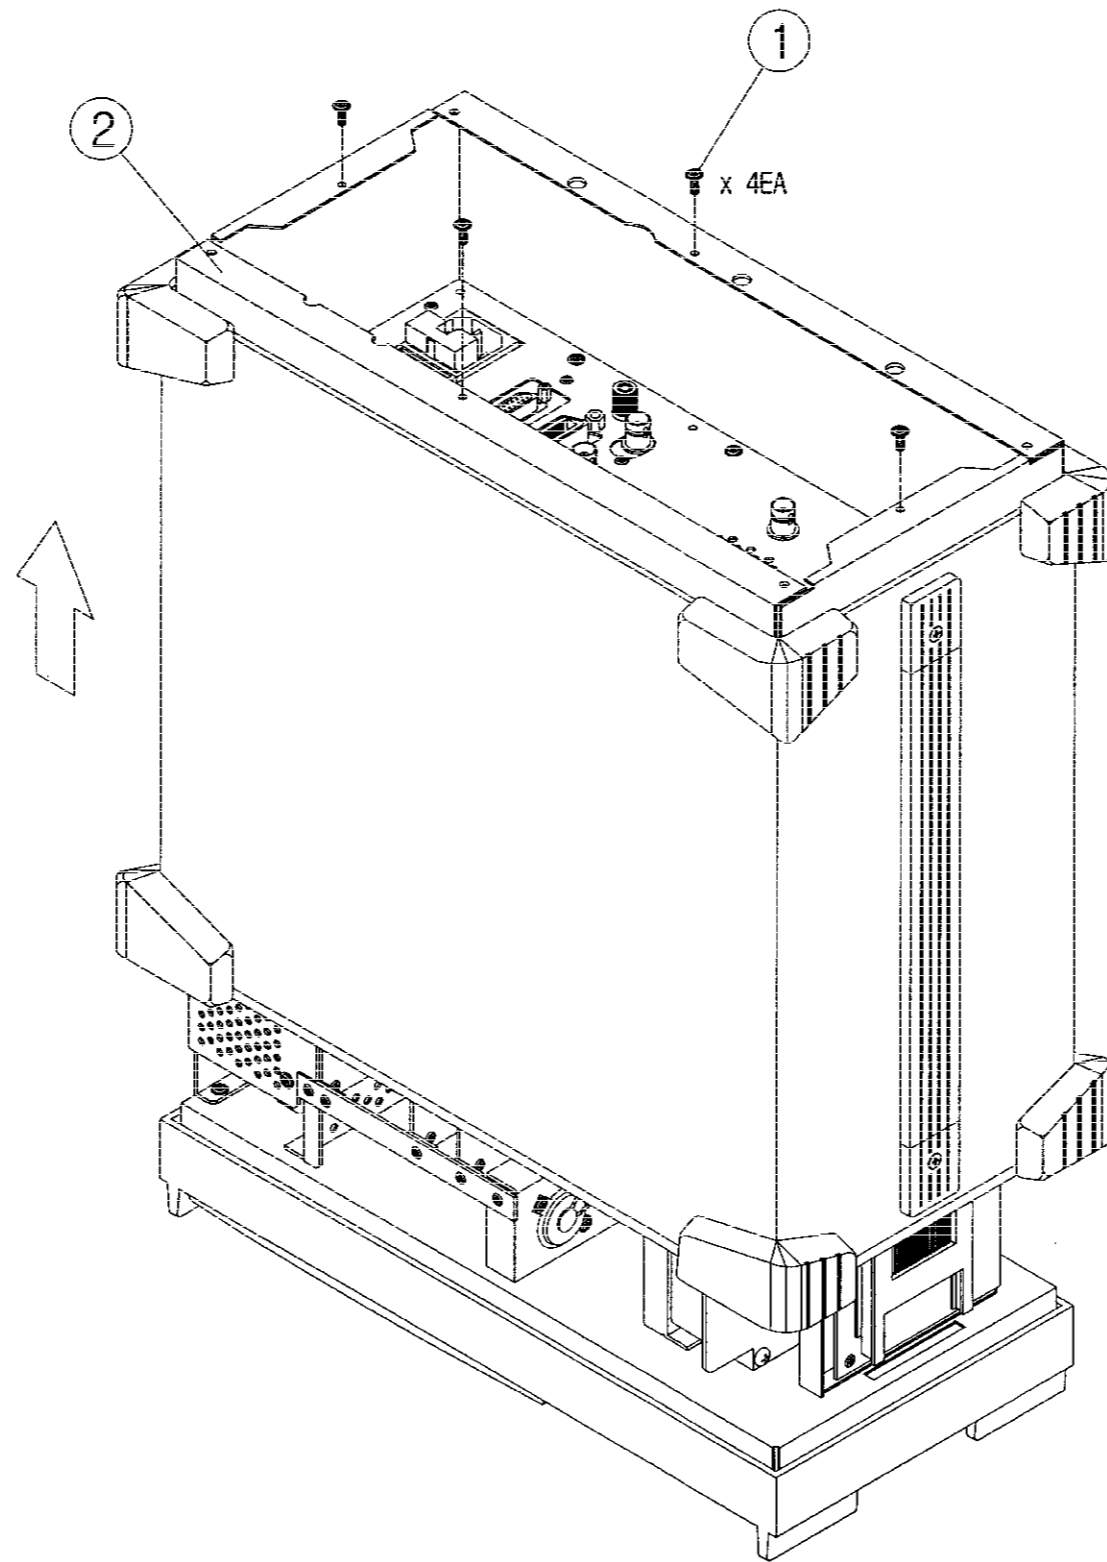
CAN COVER ASSEMBLY 5-11
